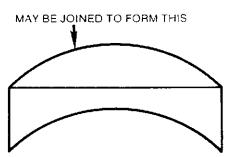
Wise planning of the layout can often make it possible to join pieces to form a particular shape. It is also a way to economize with material.
